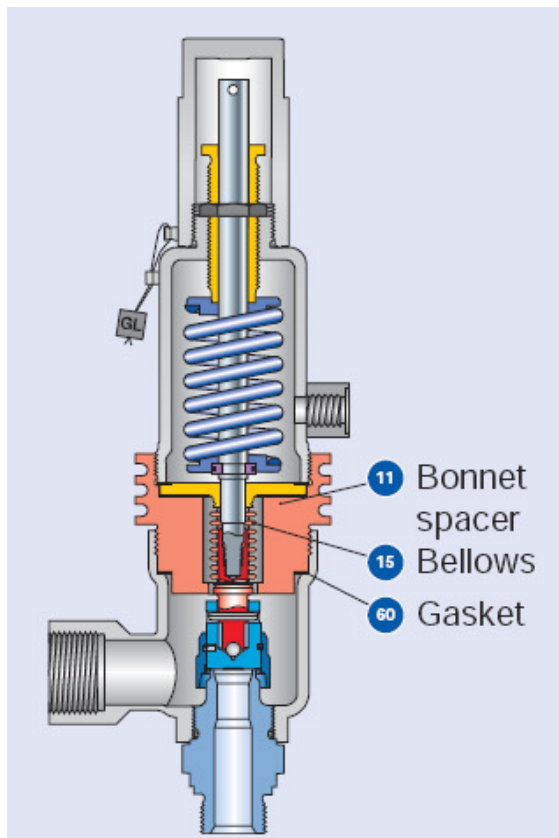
Parts of a balanced bellows spring loaded safety valve - threaded
